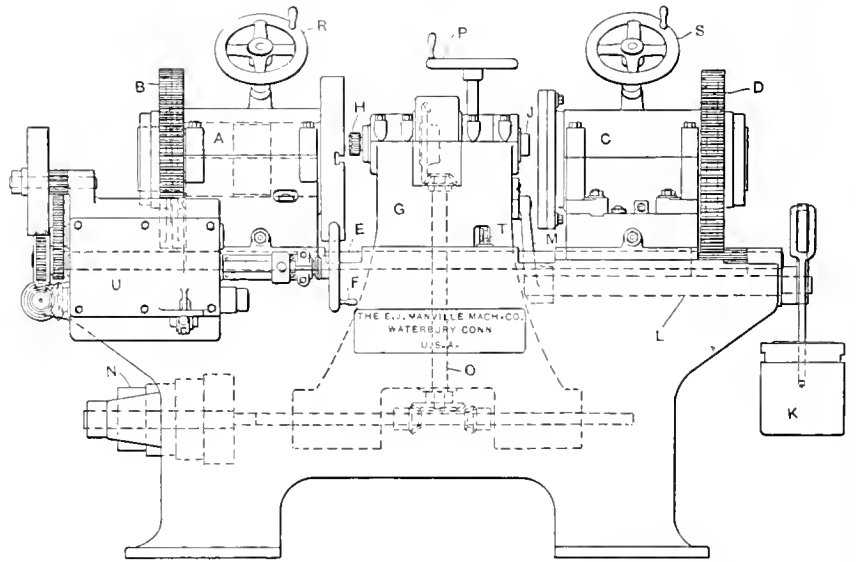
Front View, showing Driving Connections for Spindle and Rotary Feed Motion.
